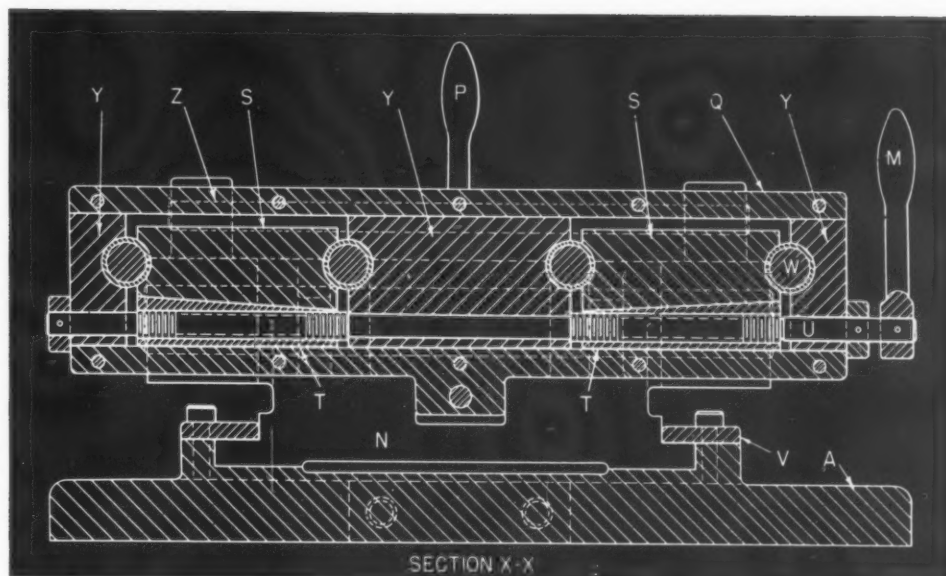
Fixture for multiple broaching of internal tapered oil-grooves in work-pieces (W). Only half of the fixture is shown in the plan view, since it is symmetrical about the center line
